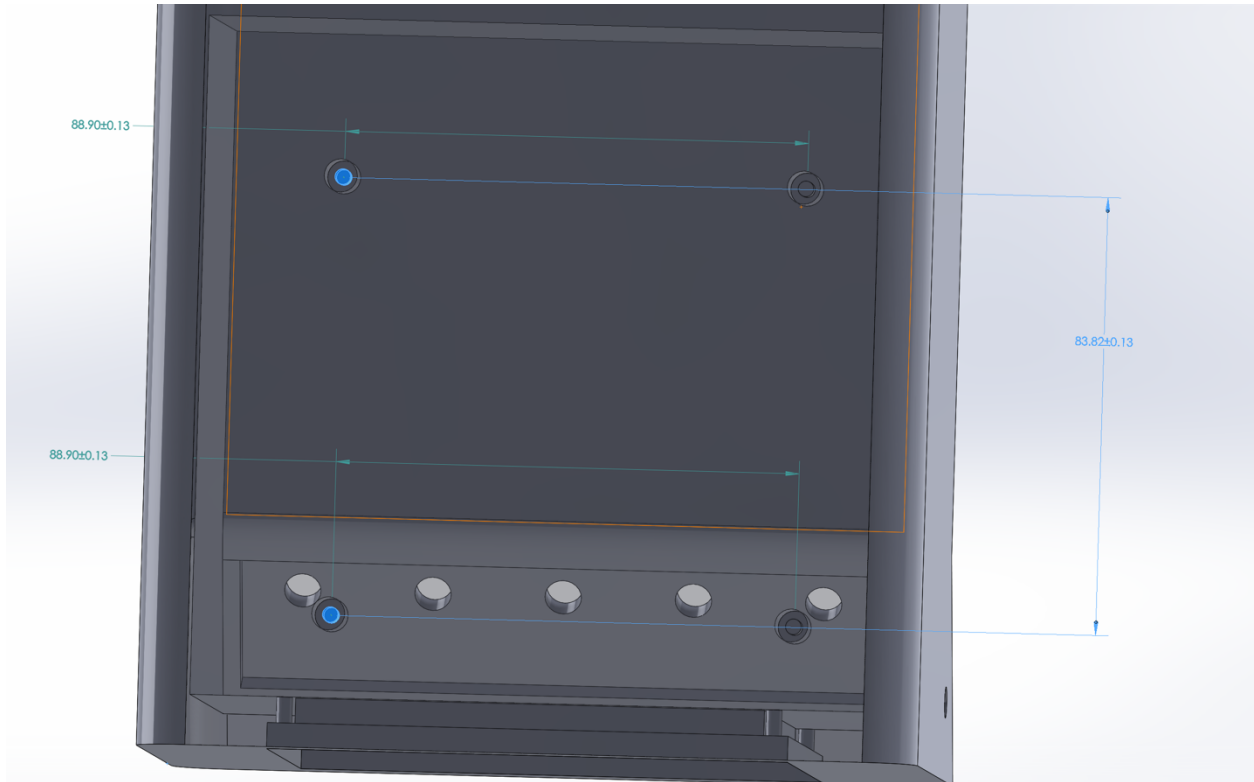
The rear of the enclosure, showing the mounting hole locations for the main circuit PCB.
